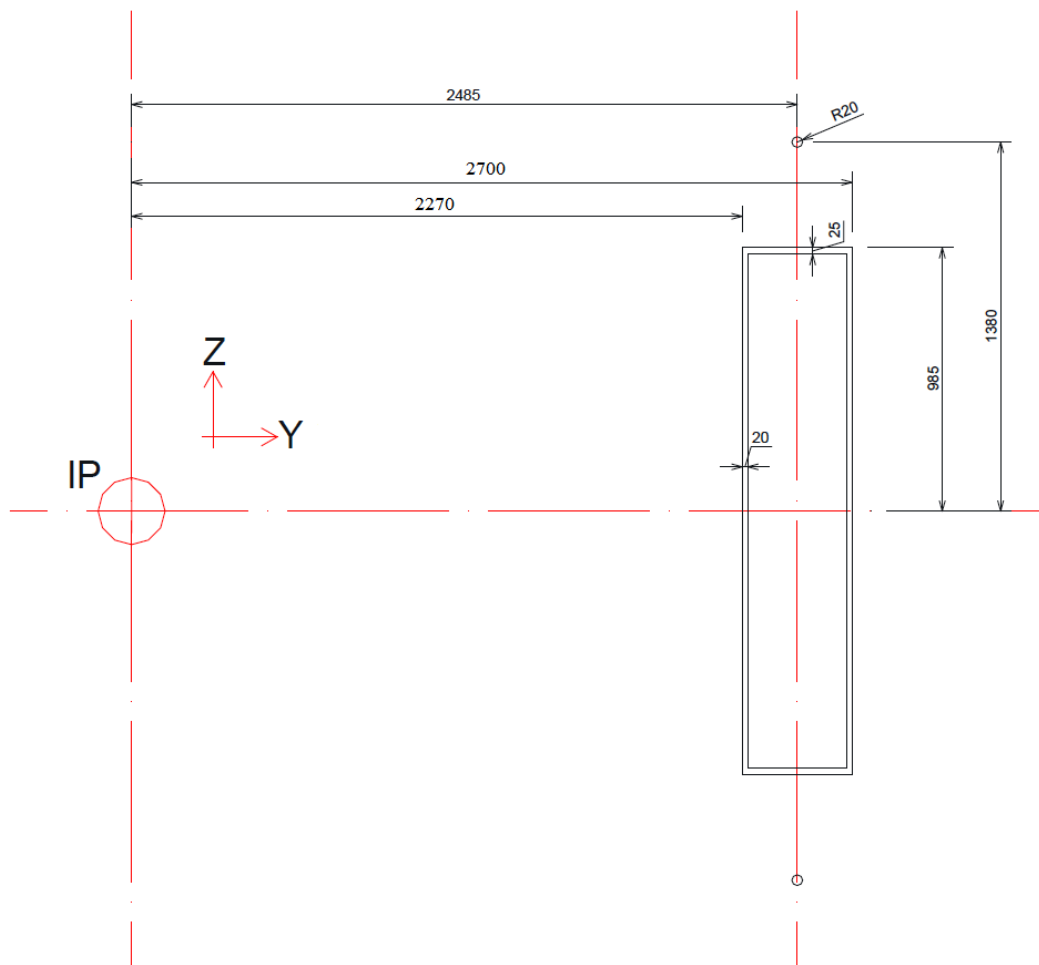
UT box position with respect to IP, side view with dimensions and mounting rails [27]
